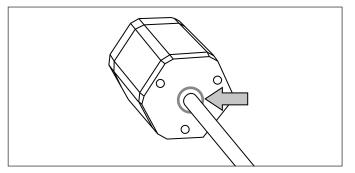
Correct position of the O-ring in the groove of the sensor electronics housing
